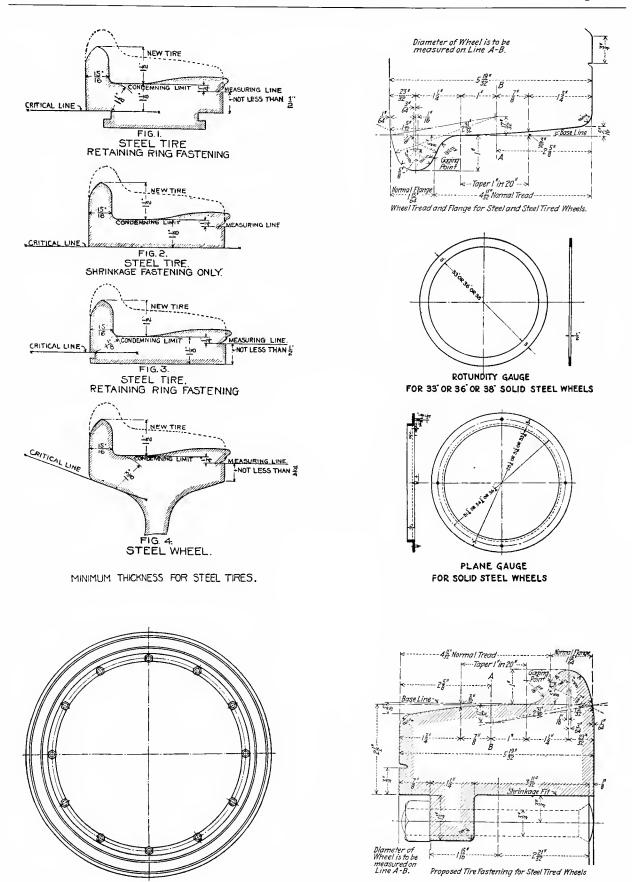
M. C. B. Recommended Practice for Minimum Thickness of Steel Tires, Wheel Tread and Flange for Steel Wheels, Rotundity and Plane Gages and Tire Fastening for Steel Tired Wheels. (M. C. B. Sheet C.)
